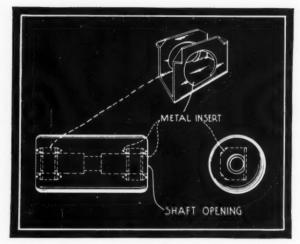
Details of small flexible coupling, showing metal inserts and manner of molding in
